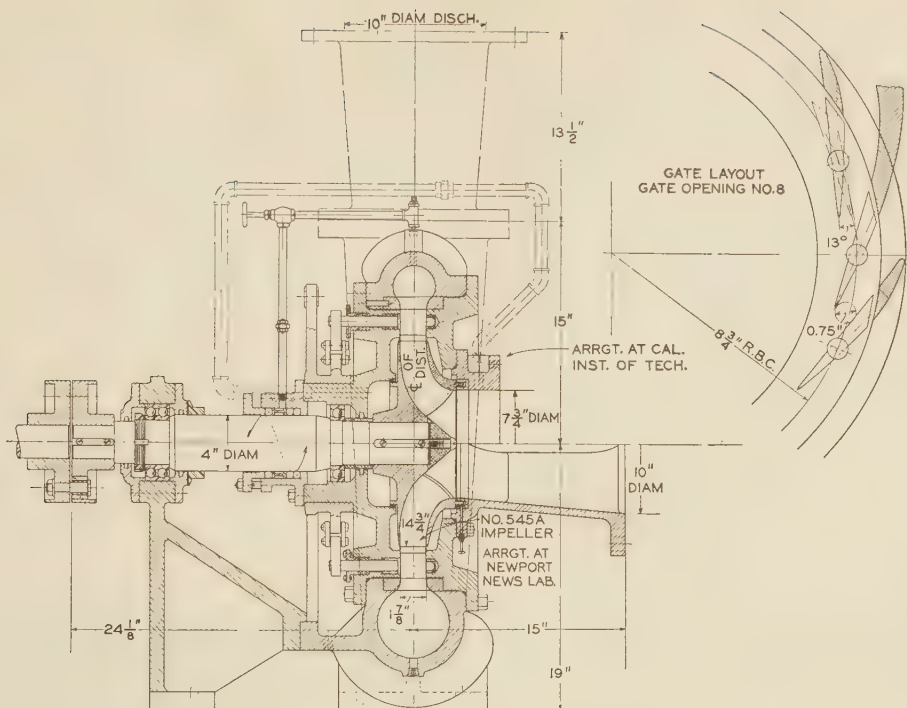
SECTIONAL ELEVATION OF PUMP-TURBINE MODEL
